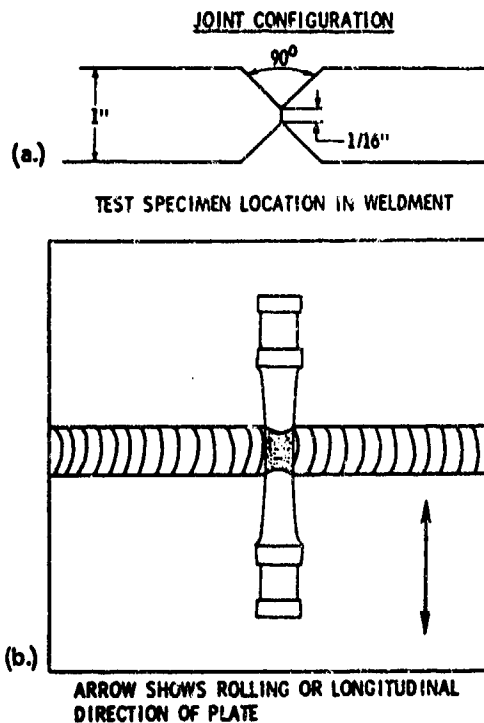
Double-vee joint for mechanical property test weldments and test specimen location in weldment.
